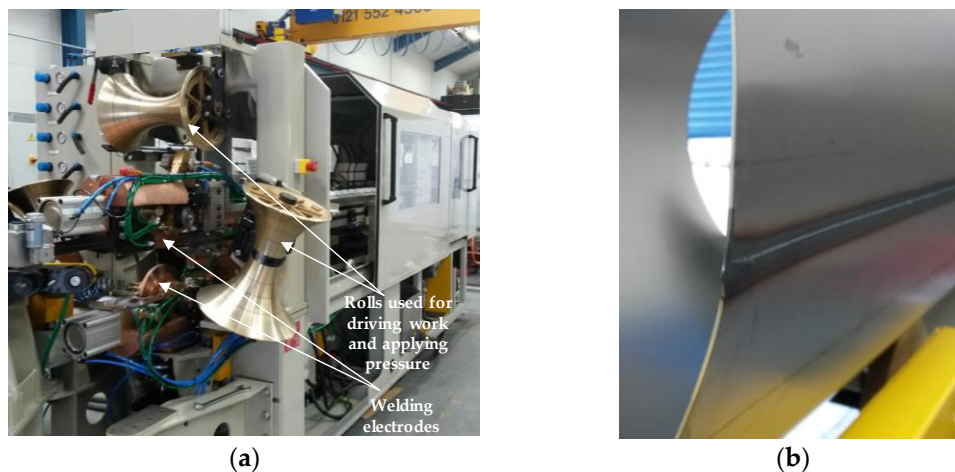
Resistance seam welding system. (a) Whole welding system; and (b) a barrel welded with the prototype as the power converter.
